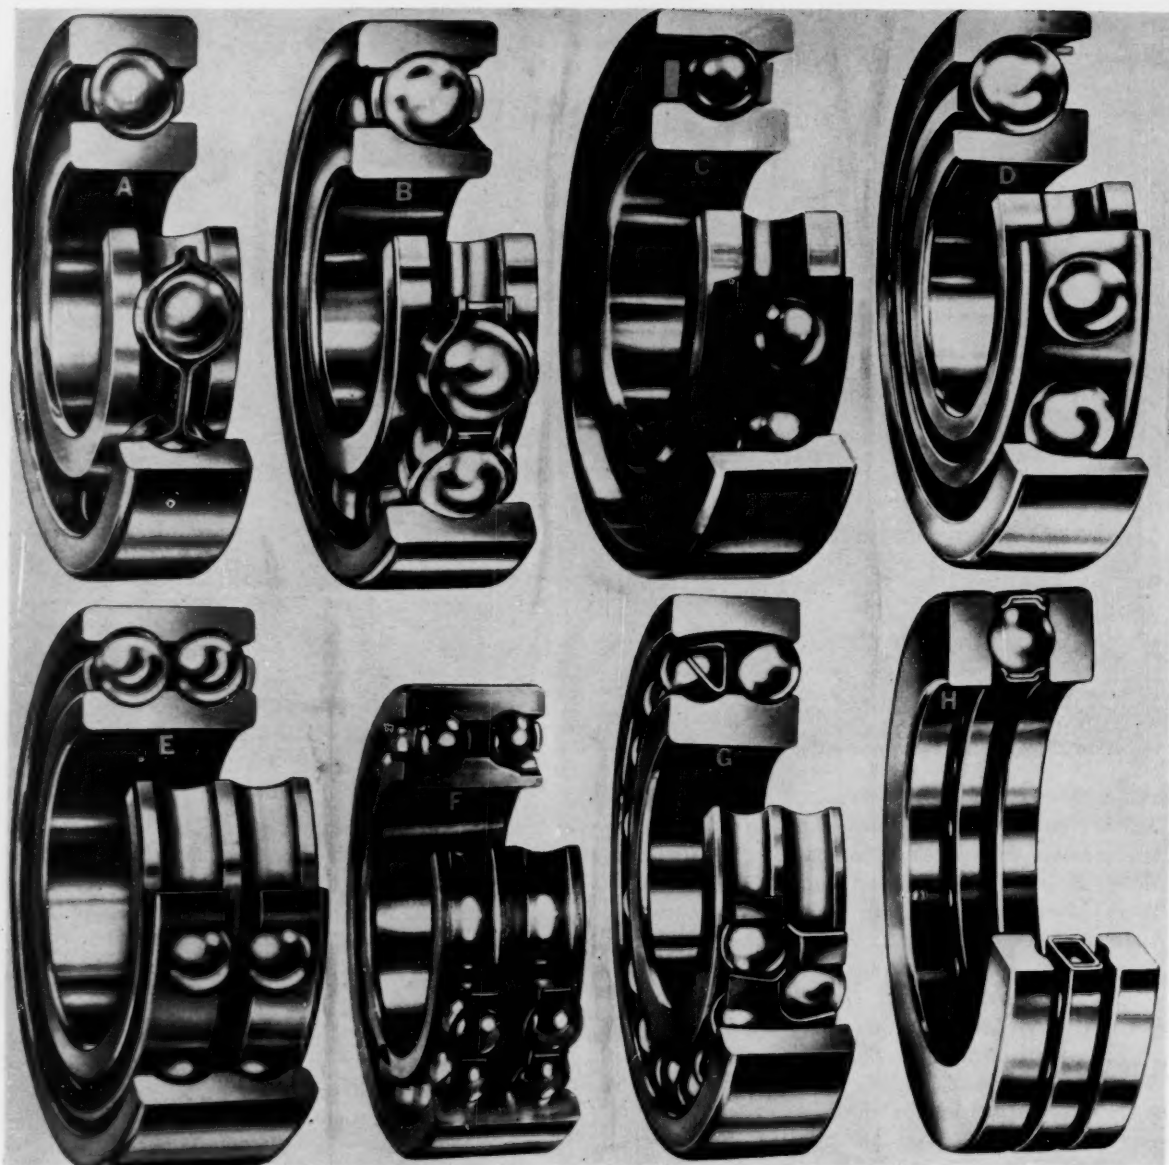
Ball Bearings. (A) Single-row radial ball bearing; (B) Single-row radial ball bearing with a fill slot; (C and D) Angular contact ball bearings; (E) Double-row ball bearing; (F) Double-row ball bearing with spring-type cage; (G) Self-aligning double-row ball bearing; (H) Thrust ball bearing.
